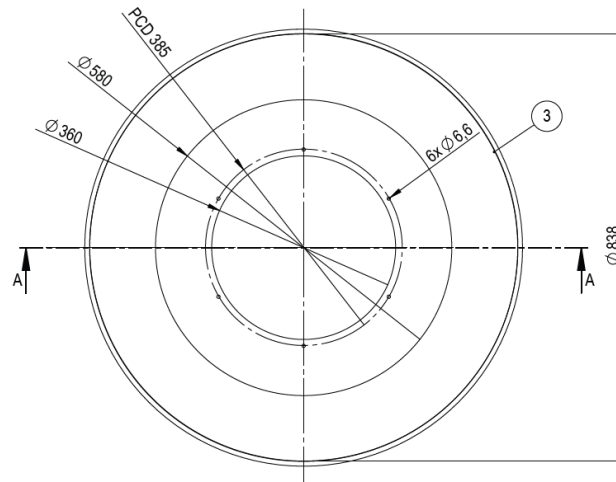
Production drawings for the Turnable Tidal Turbine housing mould
